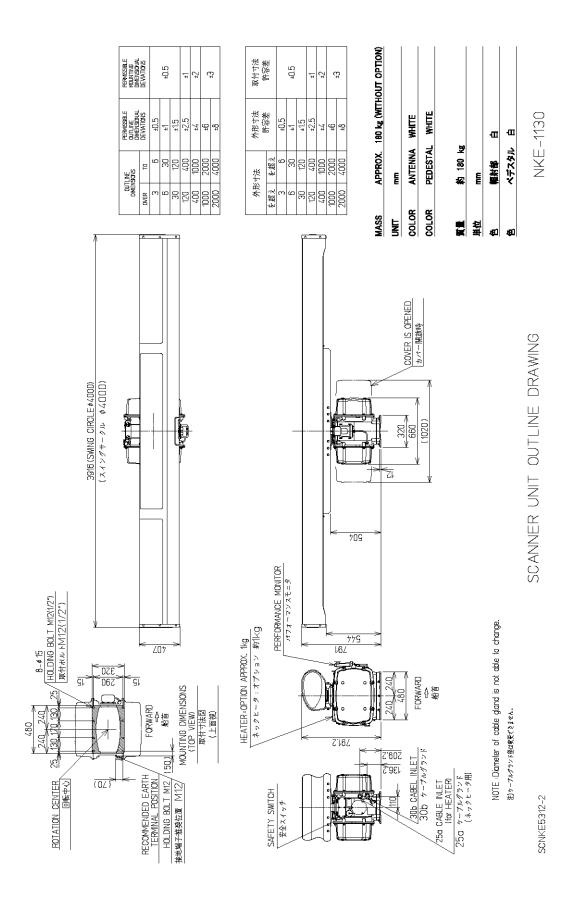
Outline Drawing of Scanner Unit, Type NKE-1130
